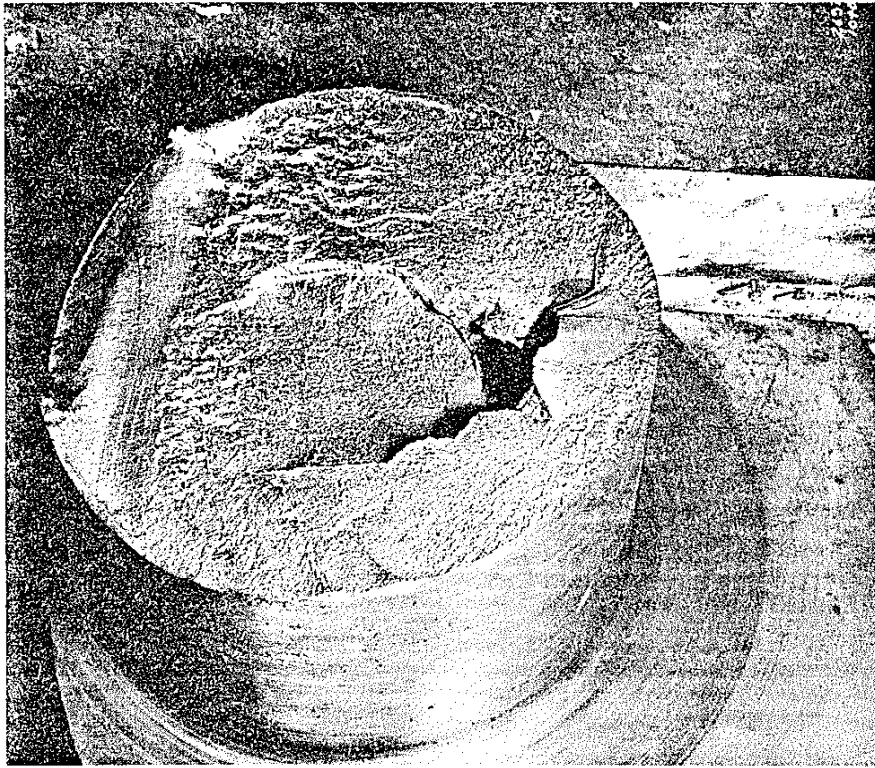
Fracture of Large Diameter Crank Pin on 800 Ton Mechanical Press.
